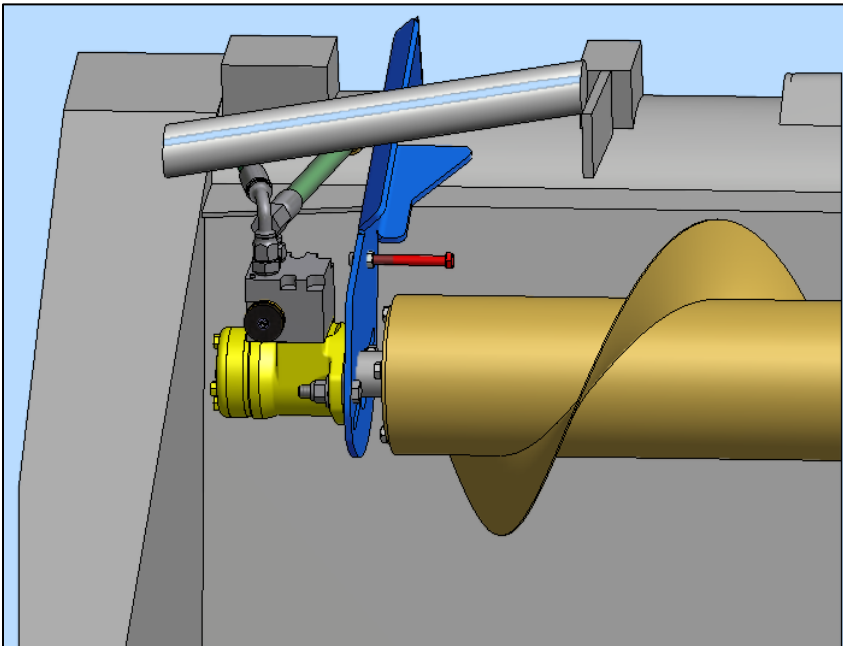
RIGHT HAND END MOUNT AND DRIVE
